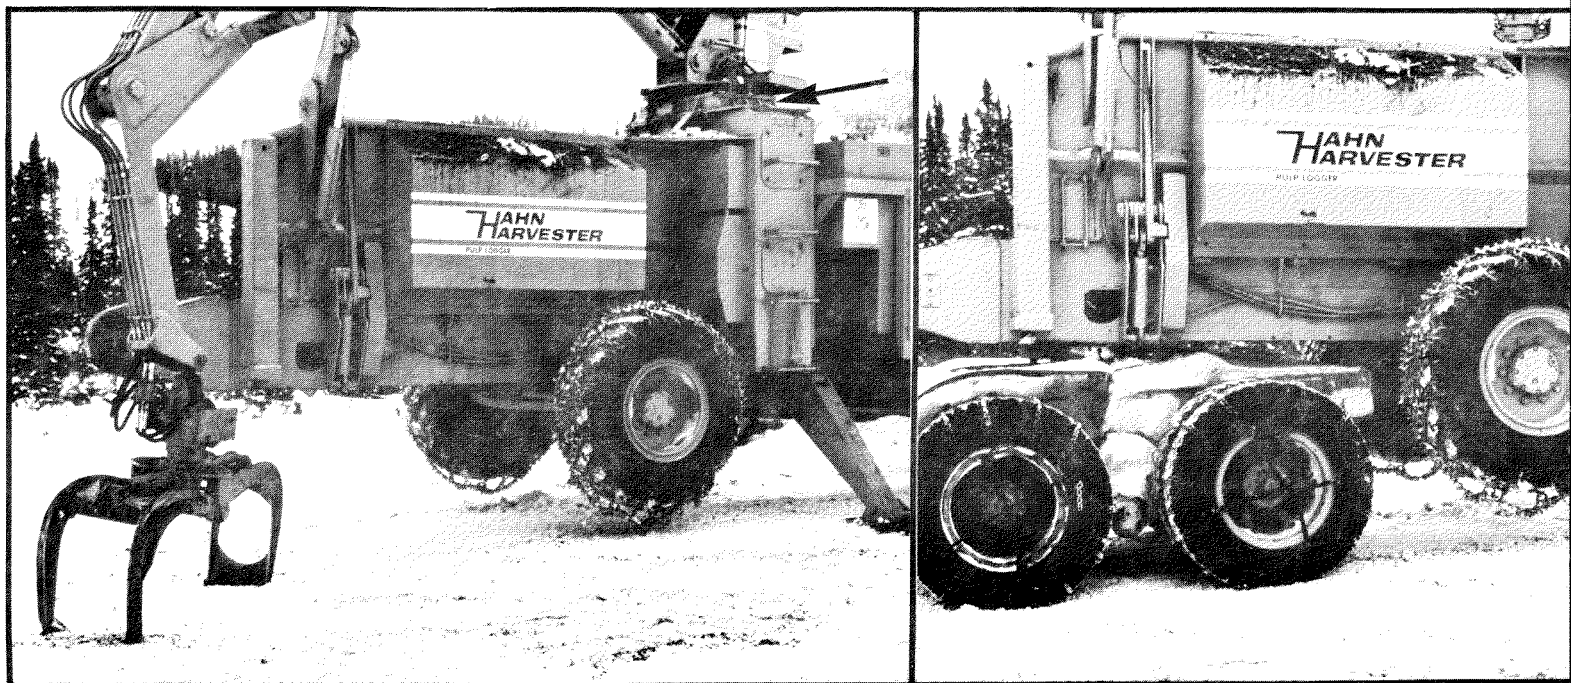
Structural cracks in the base of the loader (see arrow) may be partially caused by using the loader to lift the front end of the machine, to allow a 5th wheel to be inserted.
